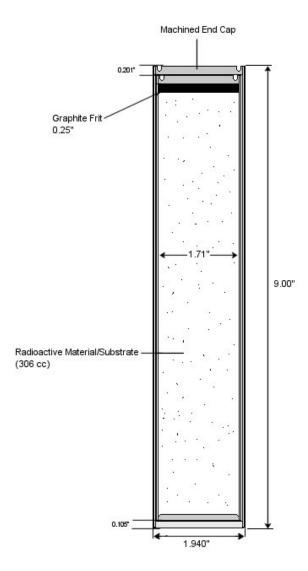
PDP Standard Encapsulation Assembly, Elevation View
